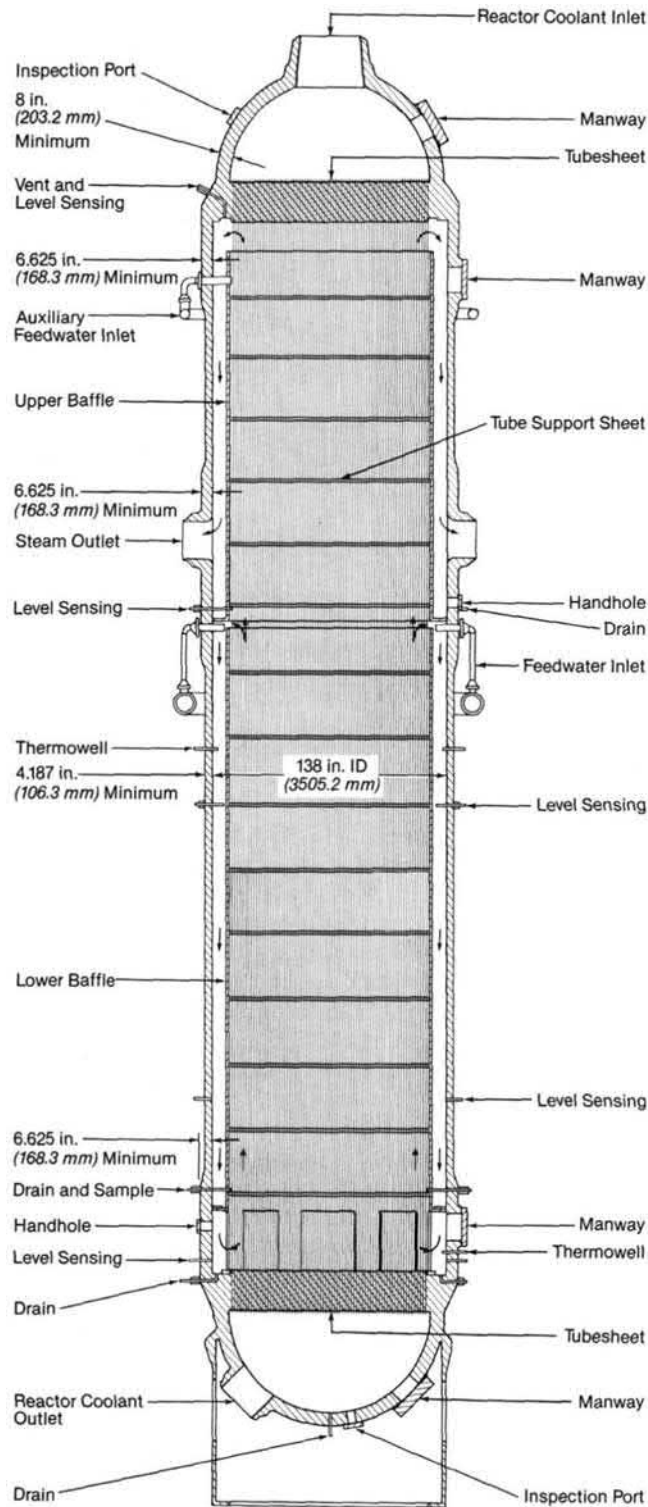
B&W Straight thru Steam Generator. Babcock and Wilcox (1992) *Steam – Its Generation and Use*, 40th edn.
